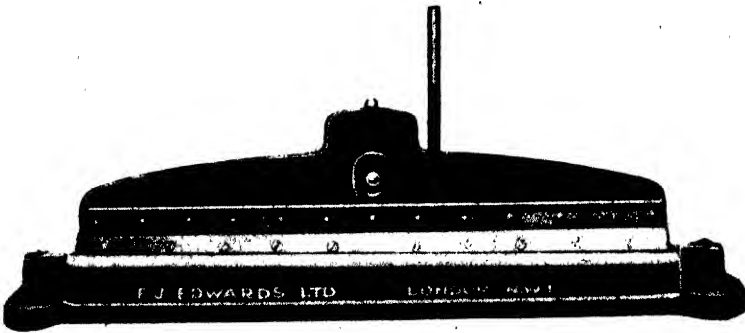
ROLLER-BED FOLDING MACHINE
